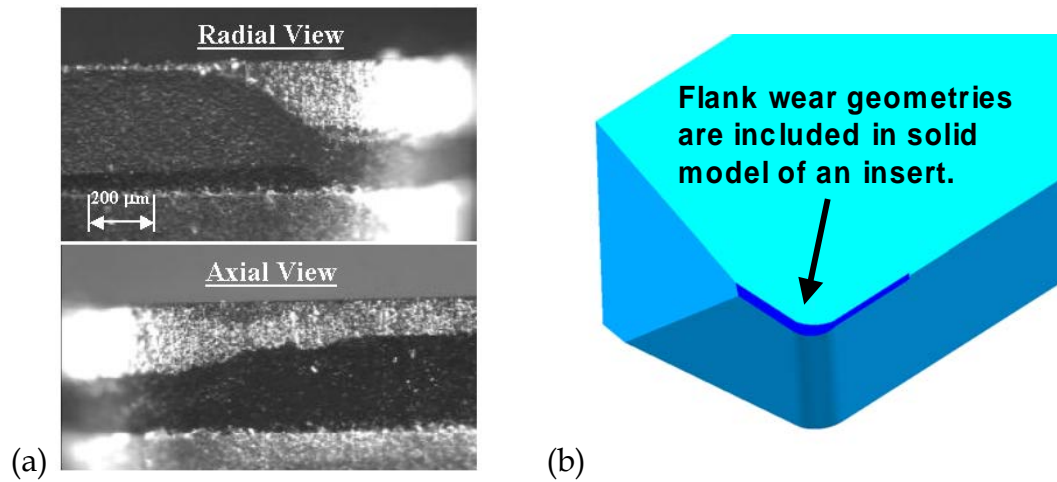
(a) Flank wear on the actual tool and (b) a 3D solid model of a worn insert
